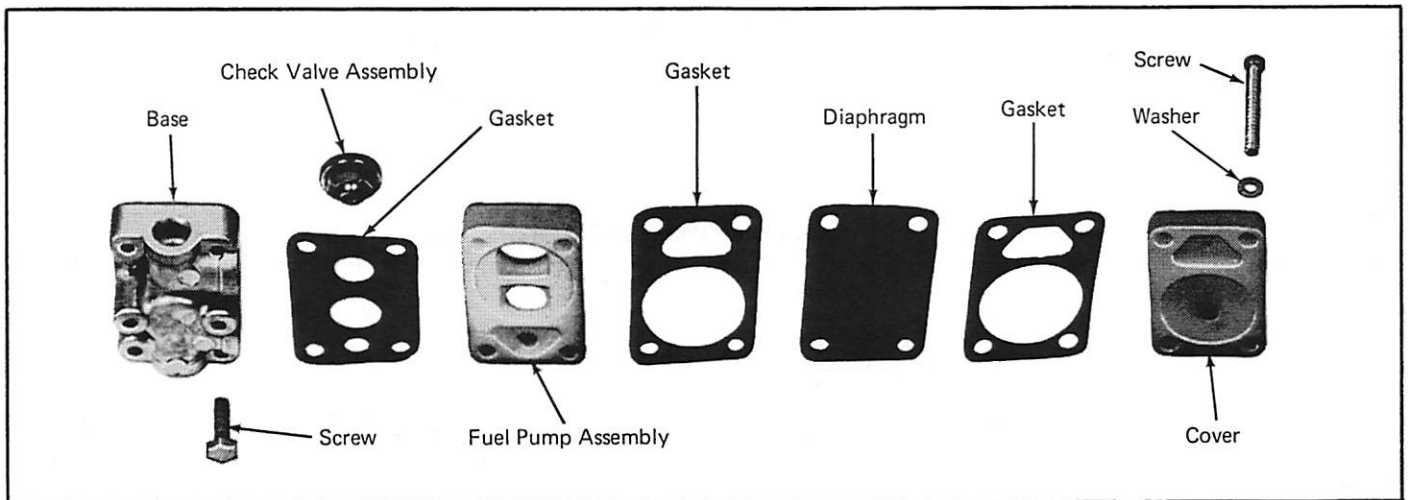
Fuel Pump A-53238A3 Type, Exploded View
